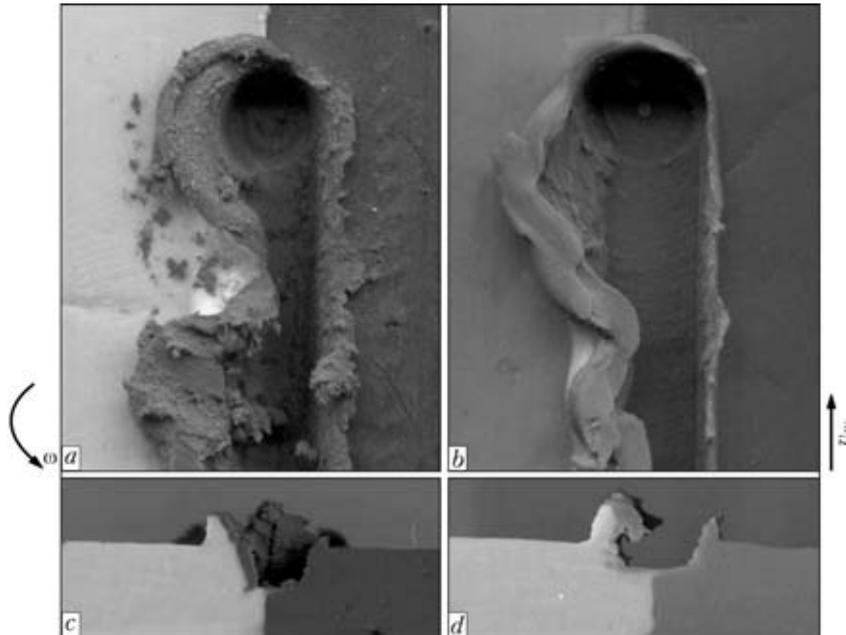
Appearance of face surfaces (*a, b*) and transverse sections of welds (*c, d*) produced by FSW without pressing the tool shoulder to materials being joined when using tips of conical shape with a smooth side surface (*a, c*) and of cylindrical shape with threaded side surface (*b, d*)
